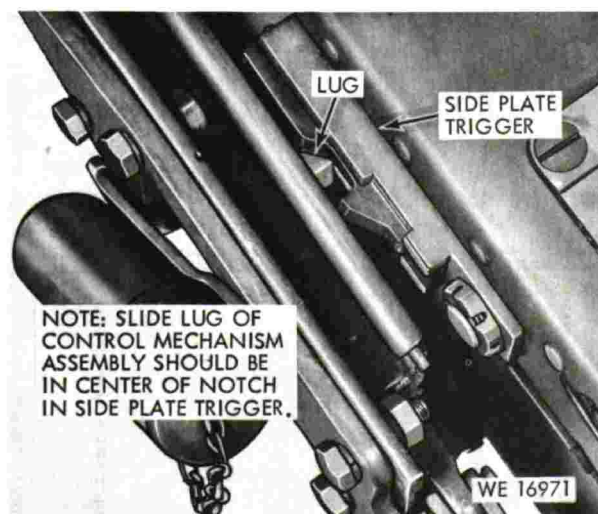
Positioning slide lug with side plate trigger assembly.
